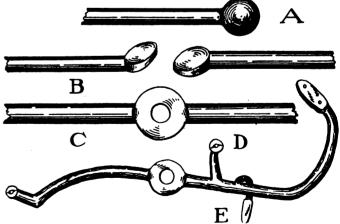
ARM RAIL FOR AN EXTENSION TOP SURREY.
